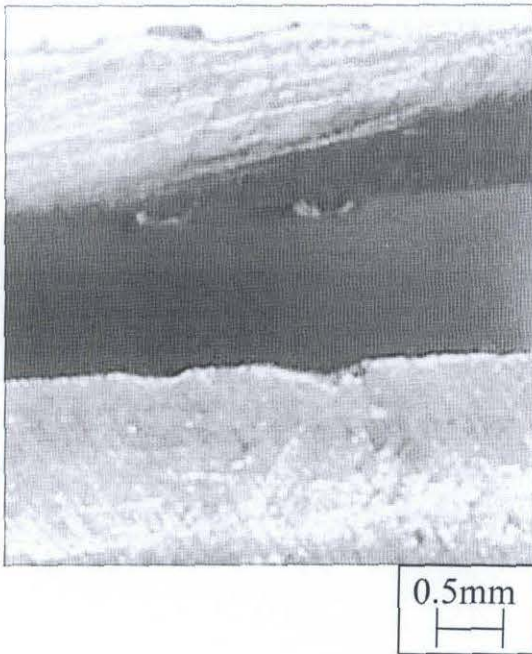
Tensile shear test specimens after testing of SPCC/A1050.
